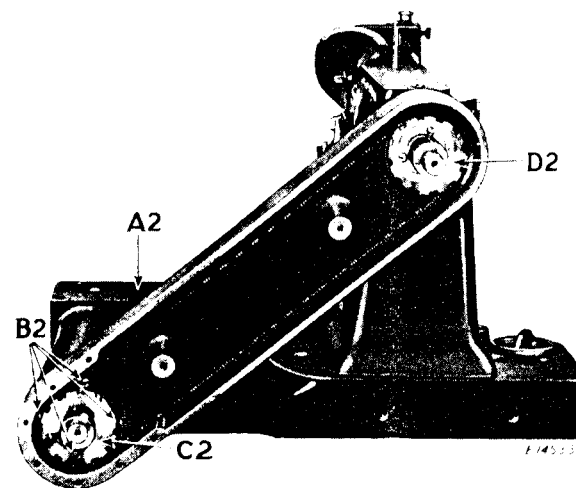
Belt Guard Cover Removed (Pulleys Shown in Phantom)
